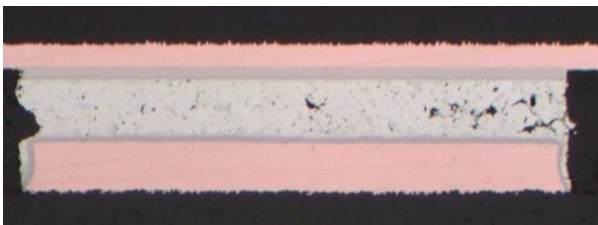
LGA SAC305 Solder Alloy – Did Not Fail
